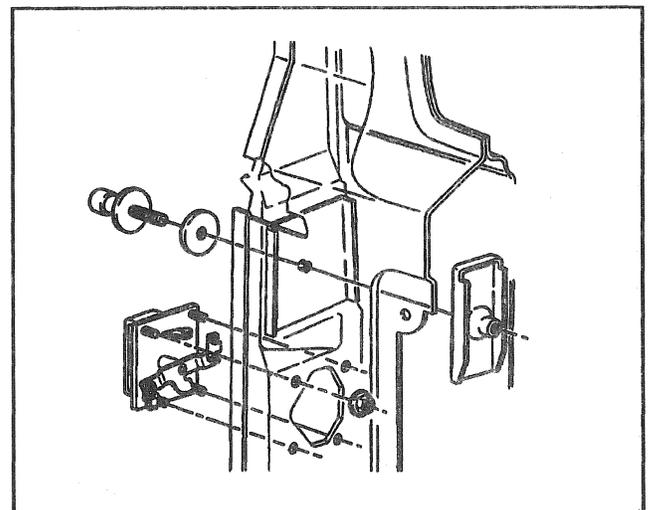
Rear Cargo Door Lock Striker and Latch Control Handle (Mounted to Left Door)
